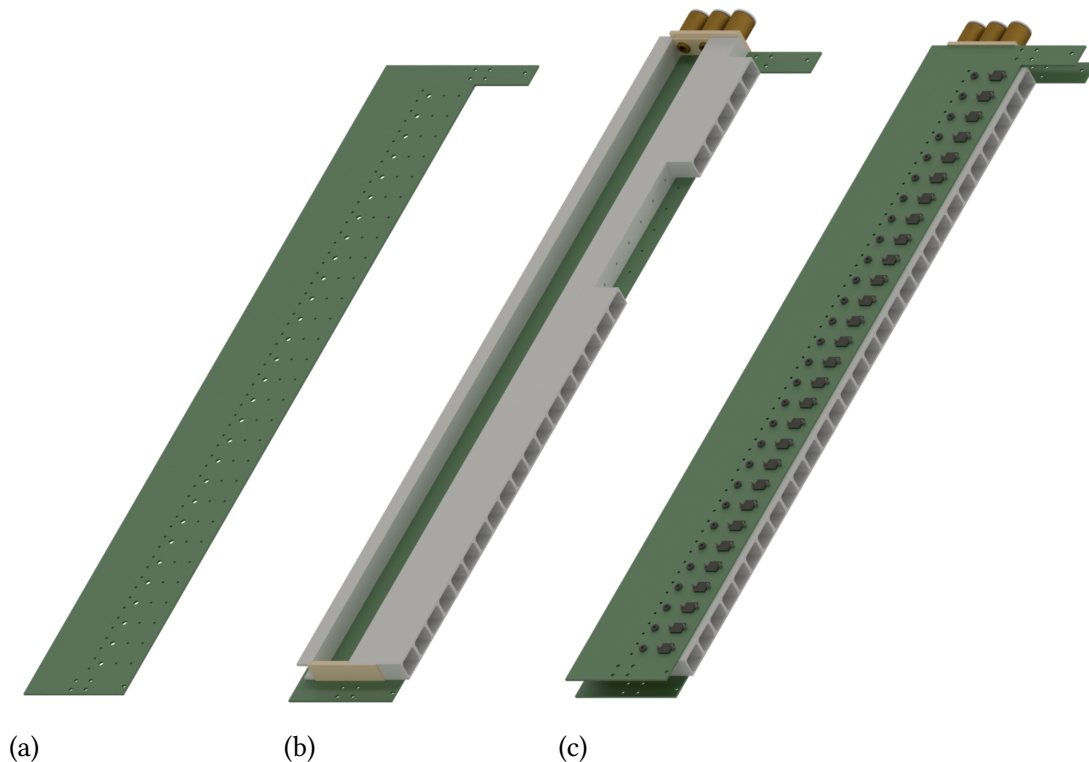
Renderings for different assembly stages of one frame side module: (a) Frame PCB without any parts, (b) Frame PCB with plastic parts and connectors for helium distribution, (c) Fully assembled frame side module with two parallel PCBs and parts for strip mounting, but without any other electrical parts.
